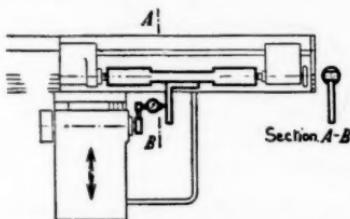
Perpendicularity to work axis of in-feed movement of grind-stone carriage.
